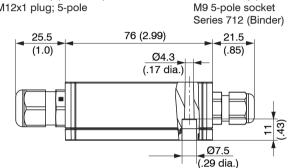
Dimensions of the controller MSC7401¹, dimensions in mm (inches),
